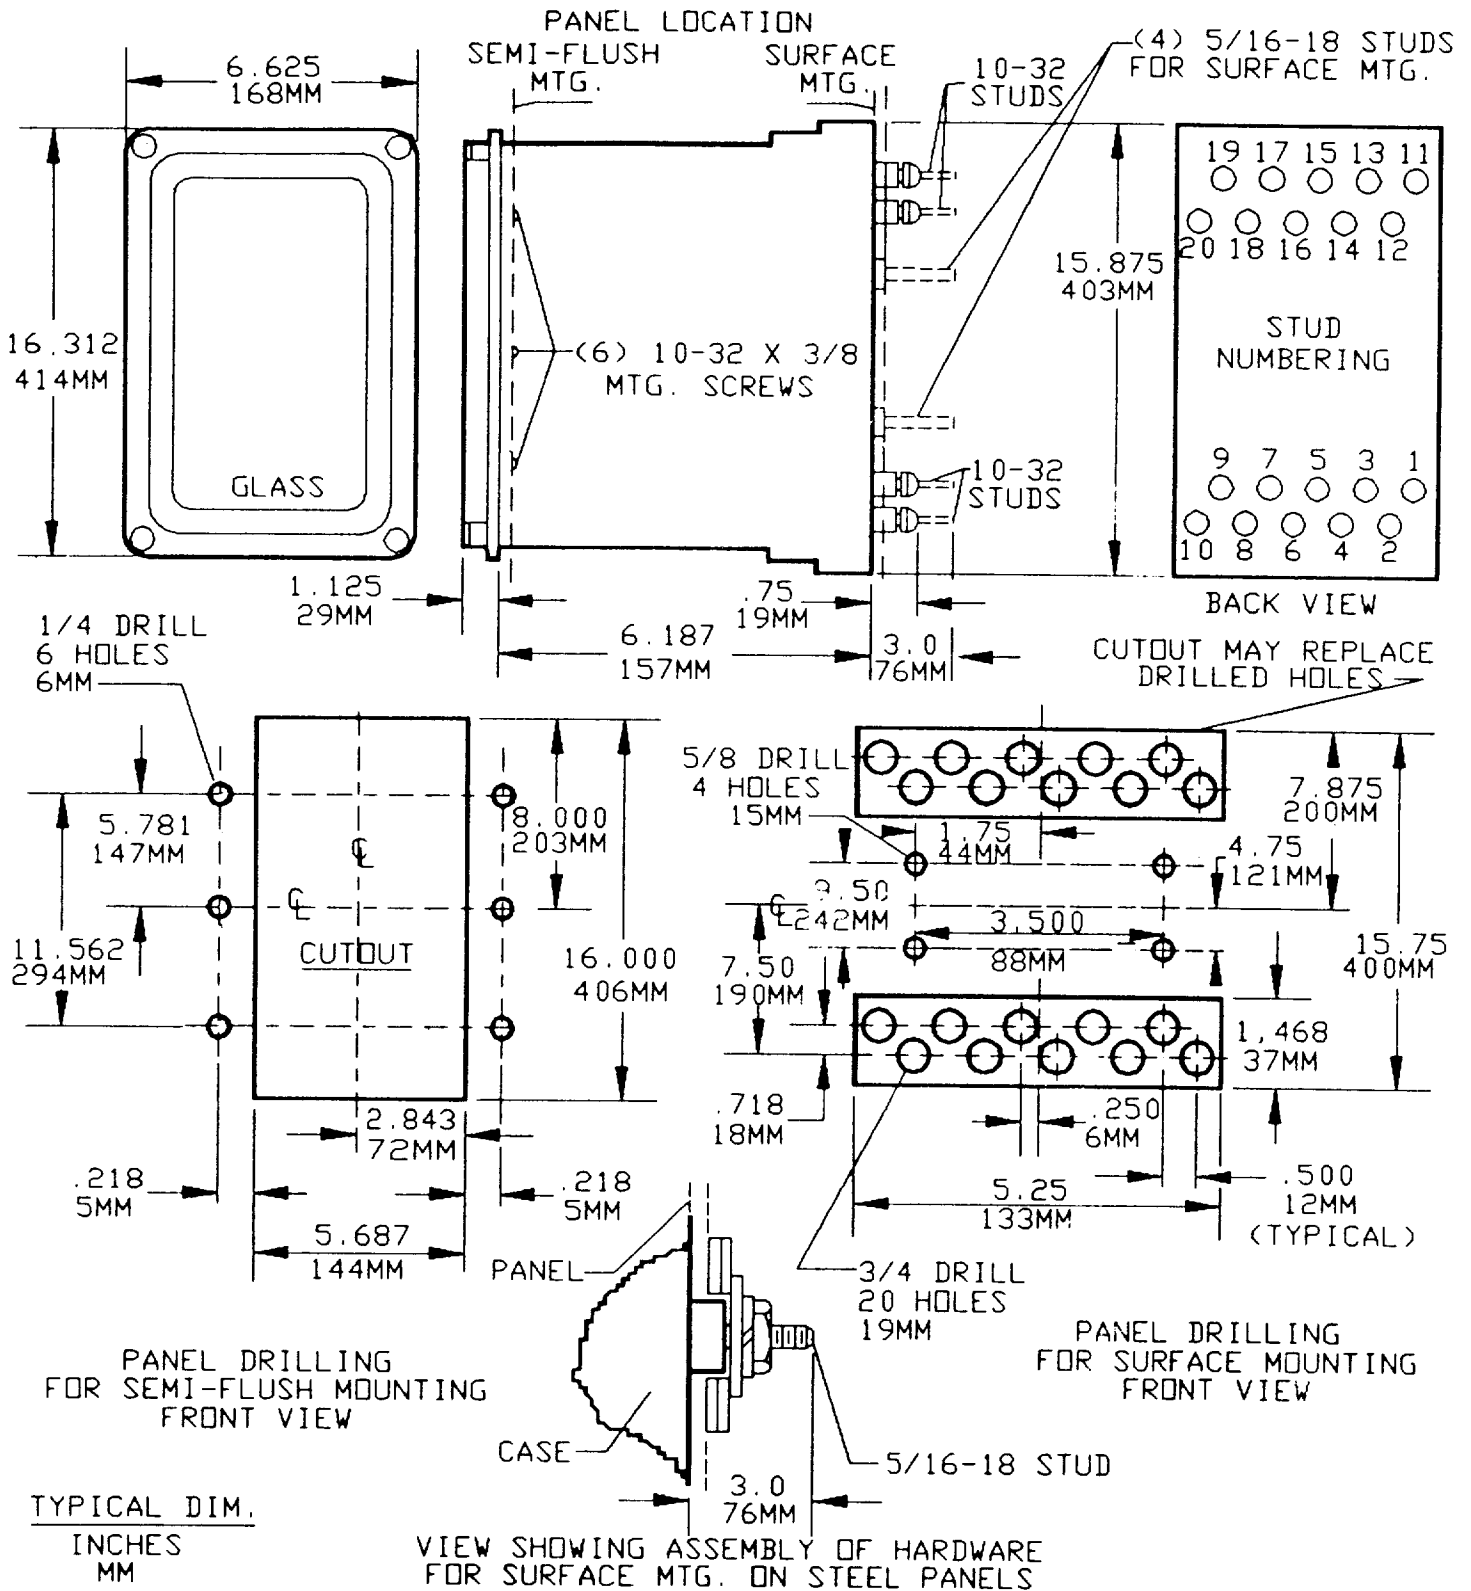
(K-6209274 [6]) Outline and Panel Drilling Dimensions Diagram for the Type CJCG16M Relay
